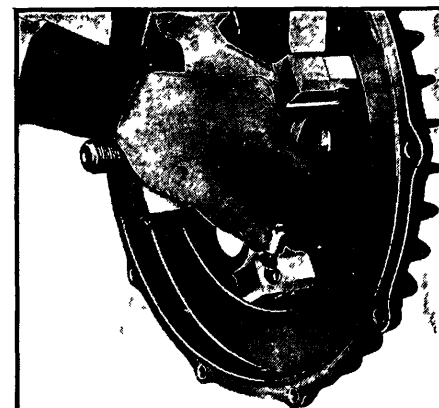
Installing buffer in spider anchor. Chrysler rear disc brake
